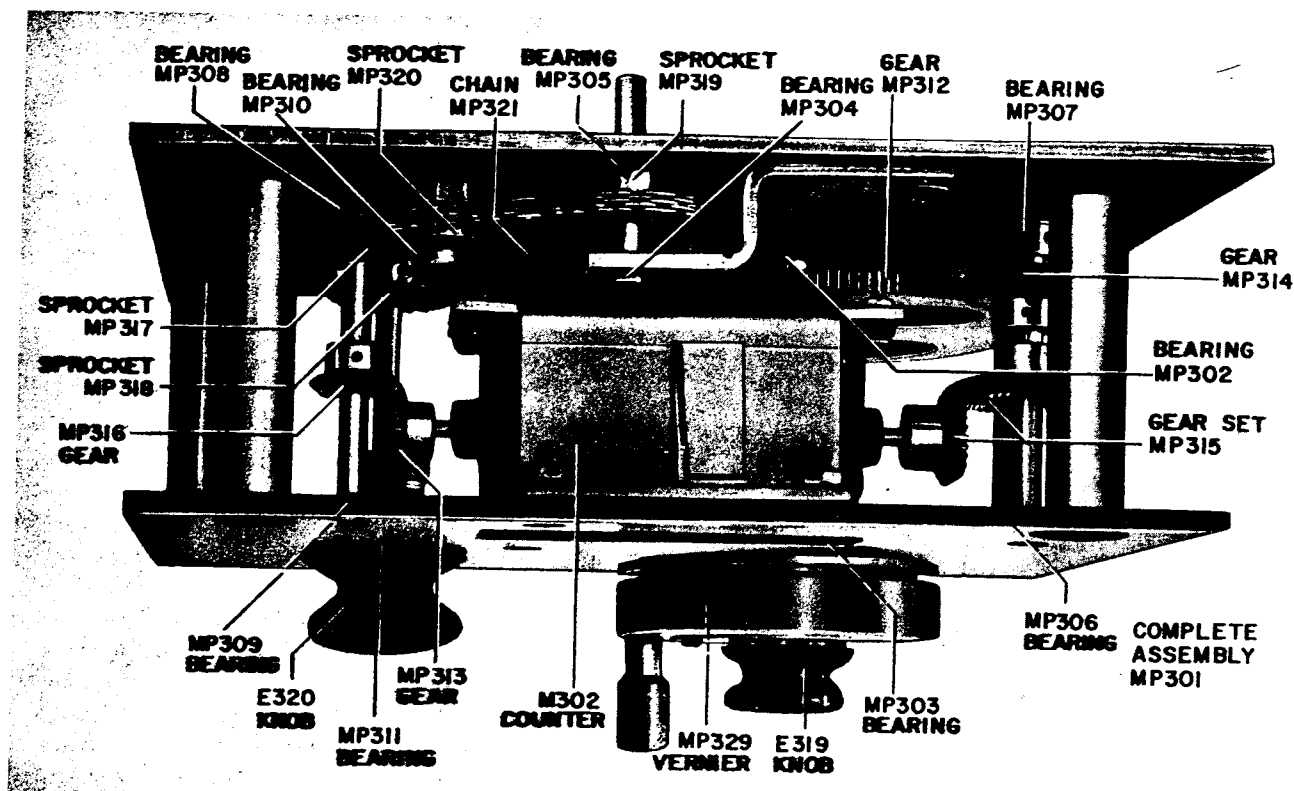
Radio Frequency Oscillator O-621/WRT-1, Master Oscillator Gear Train Disassembly
